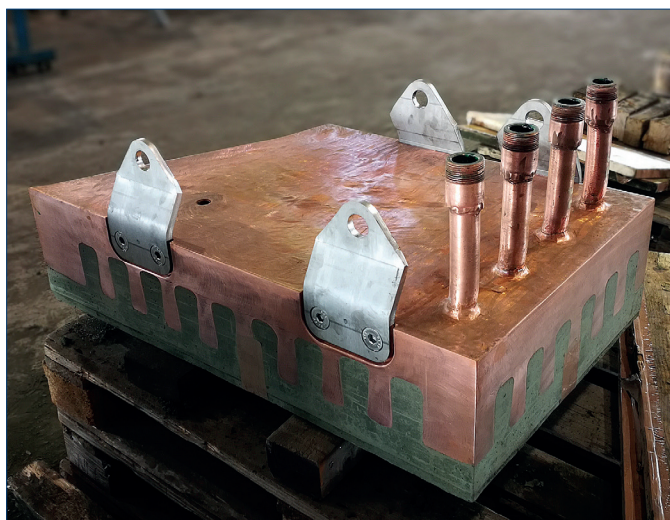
Copper cooling element with cast-in tube coils and combined refractory lining
